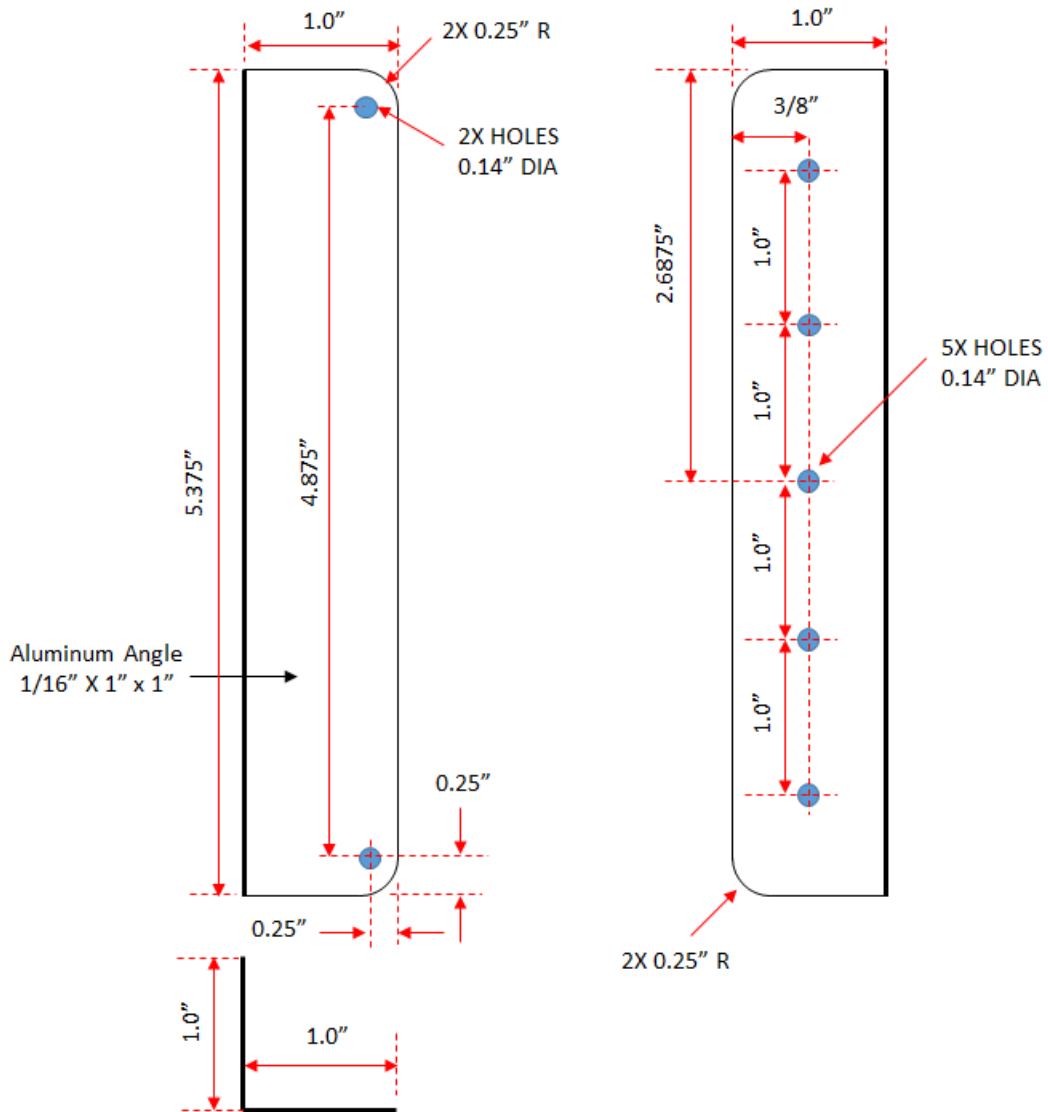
Drawings of Angle Bar for Holding Solar Panel
